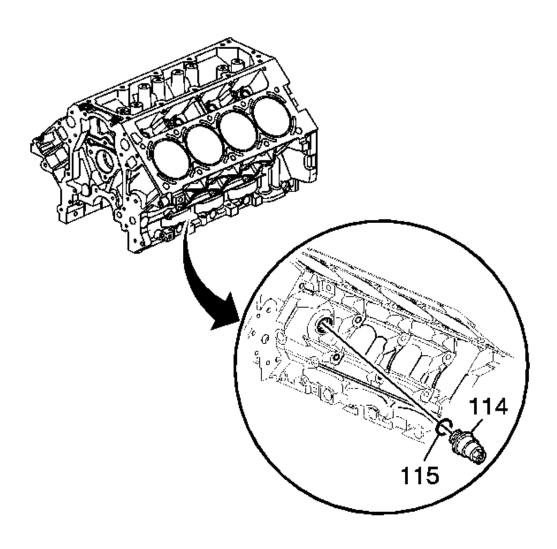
Identifying Engine Block Coolant Heater Courtesy of GENERAL MOTORS CORP.
